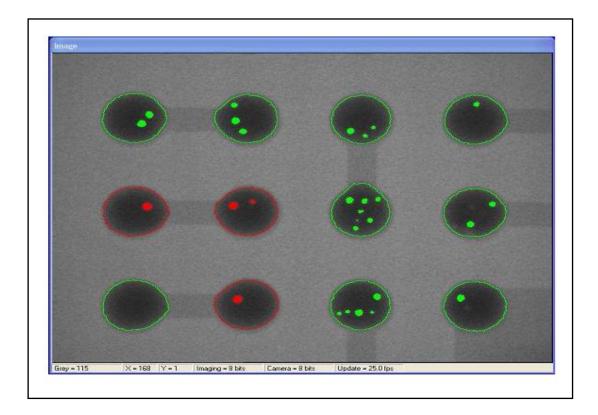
Sample of BGA solder bump X-ray visualisation.
